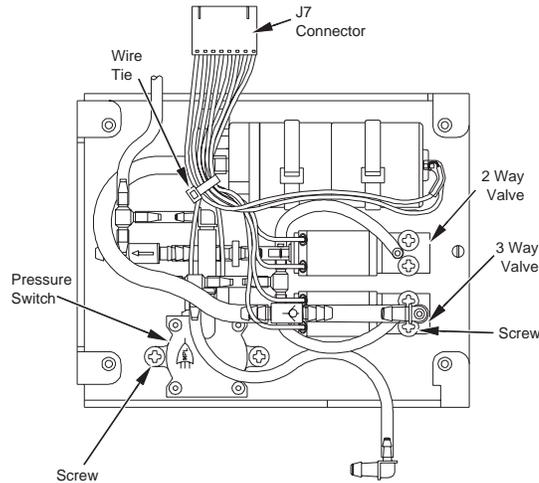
Solenoid Valve and Pressure Switch Installation
